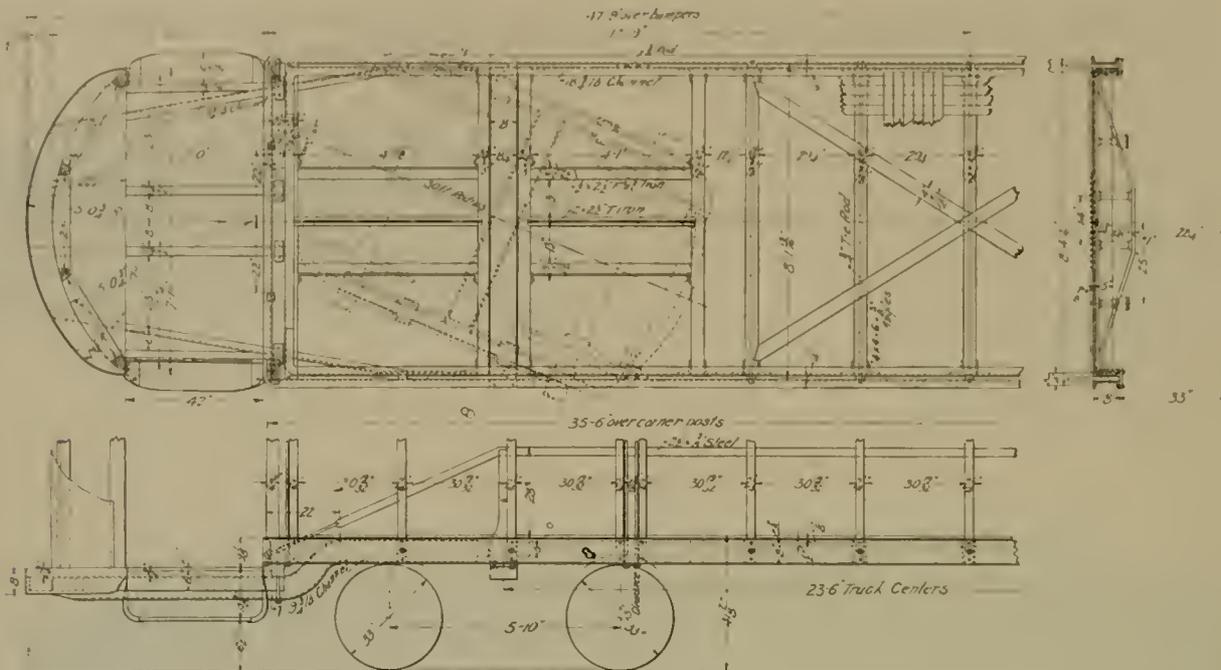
PLAN AND ELEVATION OF ROBERTSON CAR FRAMING
